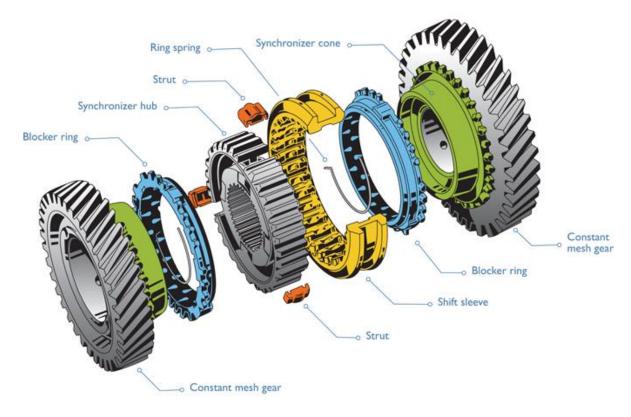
exploded view Synchromesh Unit.<sup>145</sup>
